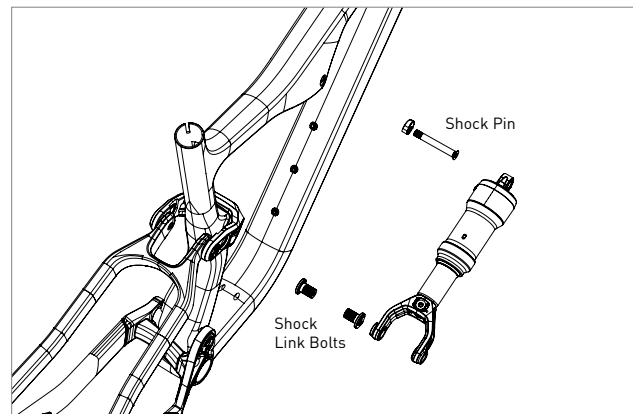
Removal of Link Bolts, Shock Pin, and Shock Assembly
